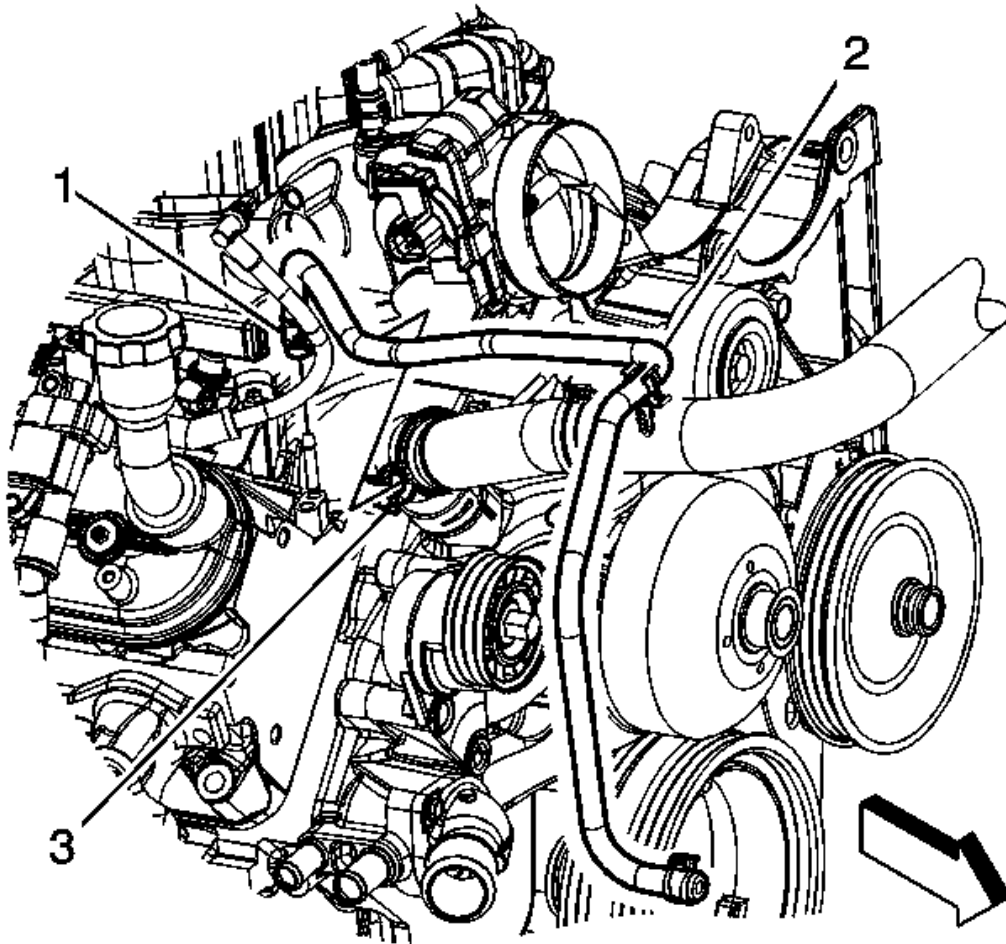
View Of Radiator Vent Inlet Hose Clamp At Water Pump
